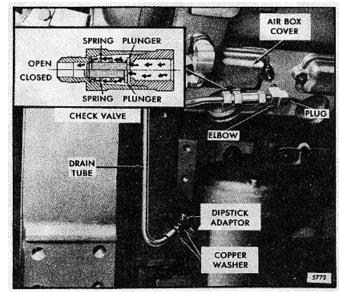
Closed Design Air Box Drain Tube and Check Valve System (6 and 8V Engines)
